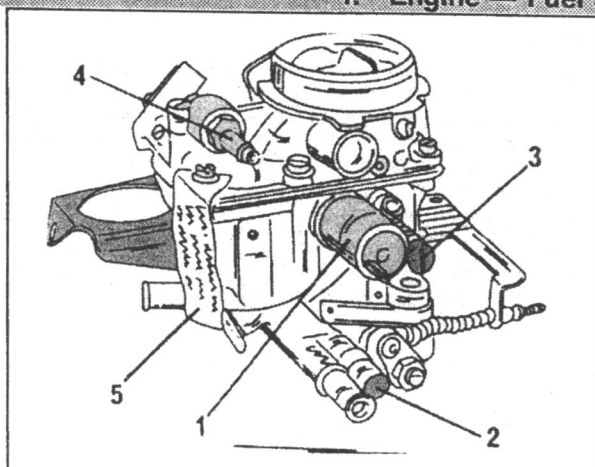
View of the carburettor from the side with the idle fuel cut-off valve.
